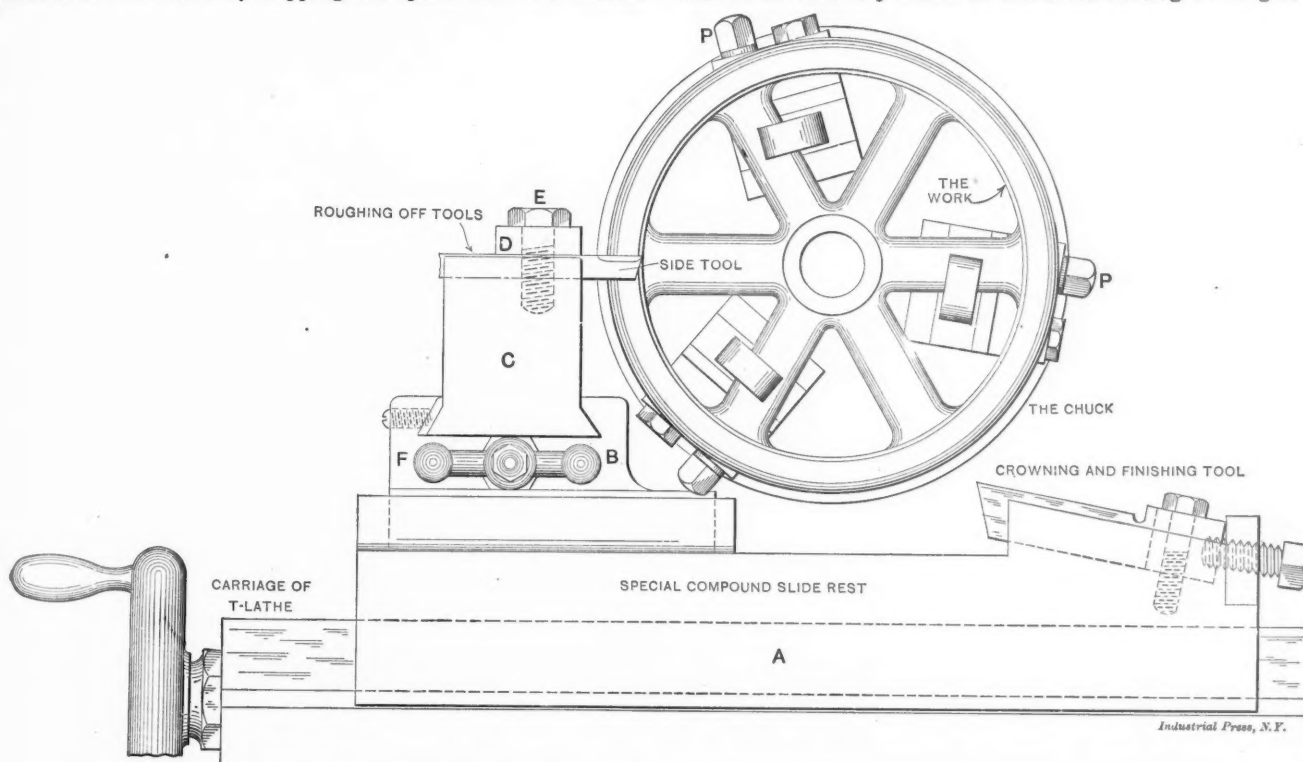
Manner of Holding Pulley in the Chuck and use of the Special Compound Slide Rest for Finishing the Face and Slides.
